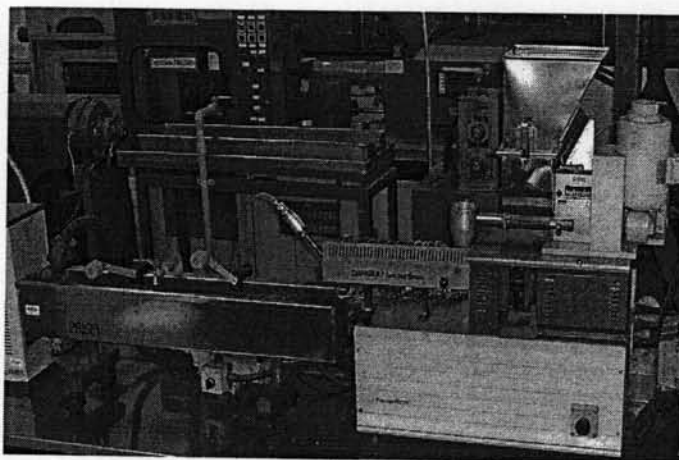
Thermo PRISM co-rotating twin screw extruder model TSE-16-TC
